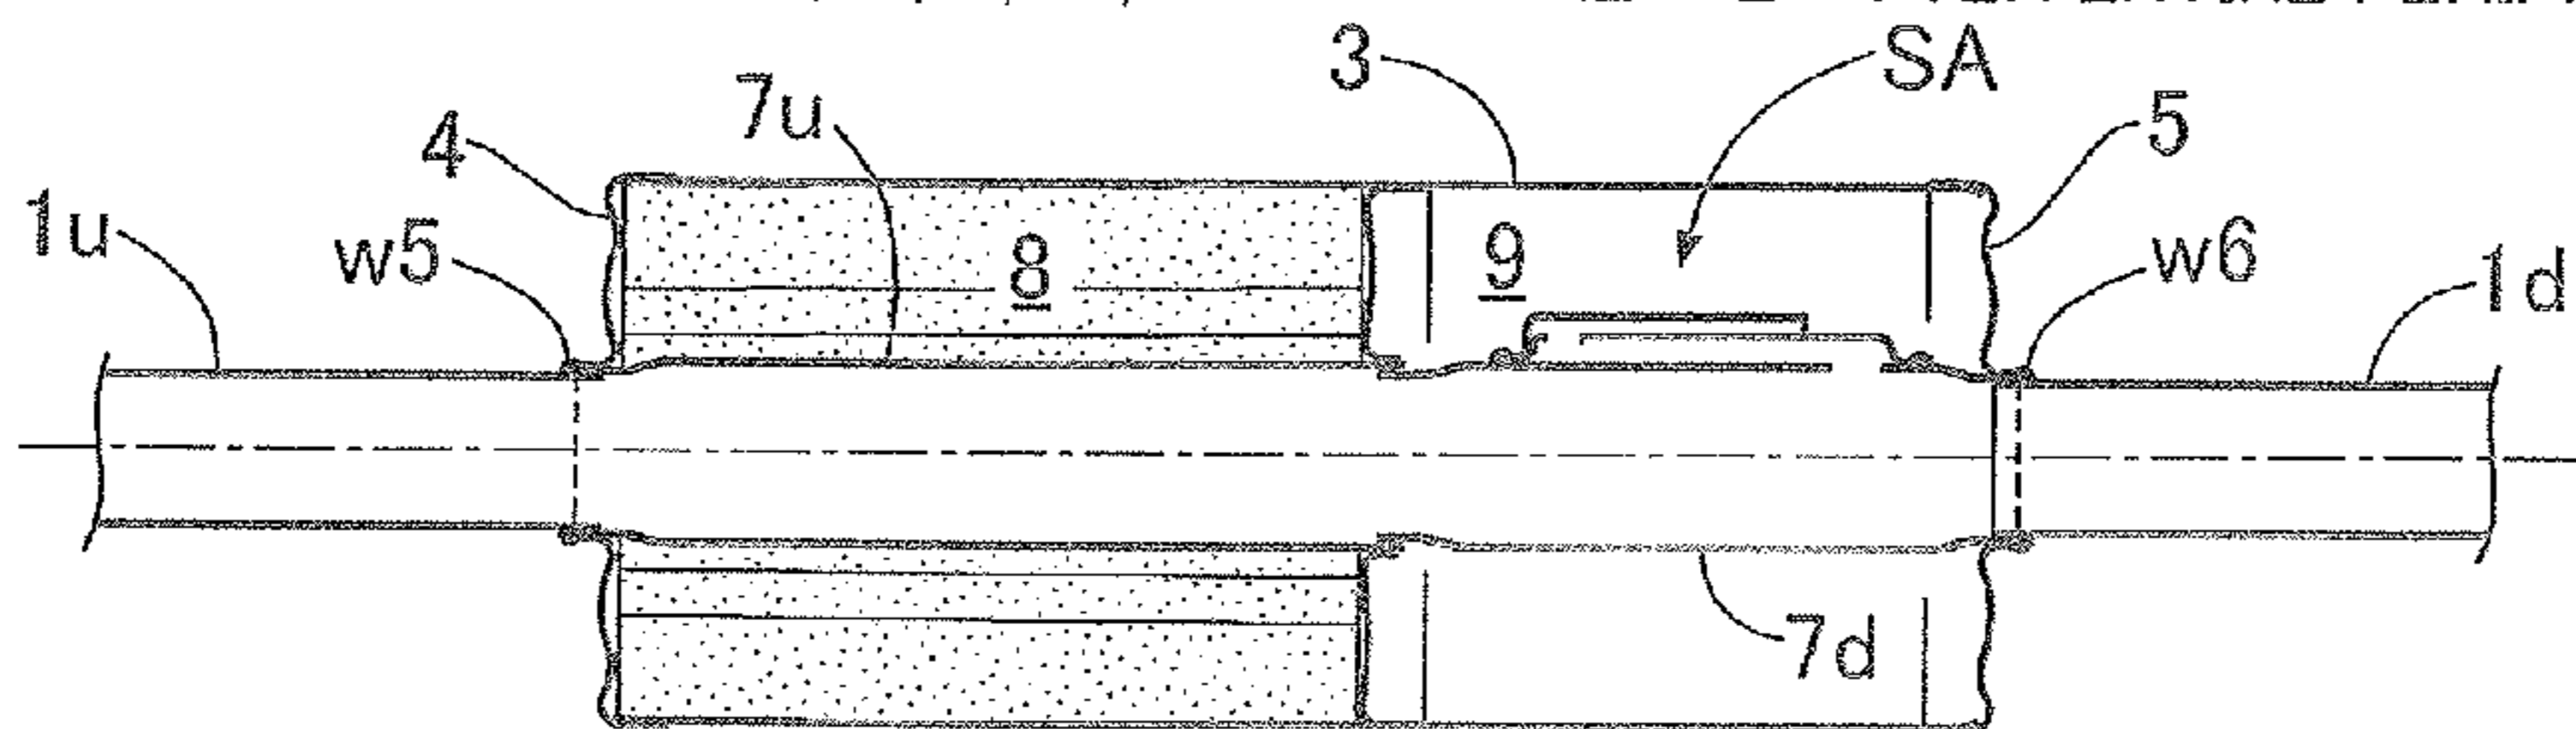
D TEMPORARILY FIX SUPPORT HOLE OF 4 AND 7u TOGETHER AT ONE POSITION BY SPOT-WELDING, AND TEMPORARILY FIX SUPPORT HOLE OF 5 AND 7d TOGETHER AT ONE POSITION BY SPOT-WELDING. THEREAFTER, FIT UPSTREAM-SIDE EXHAUST PIPE 1u TO 7u, AND THEN MIG-WELD (w5) 4, 7u, AND 1u TOGETHER OVER ENTIRE PERIPHERIES. SUBSEQUENTLY, FIT DOWNSTREAM-SIDE EXHAUST PIPE 1d TO 7d, AND MIG-WELD (w6) 5, 7d, AND 1d TOGETHER OVER ENTIRE PERIPHERIES.
